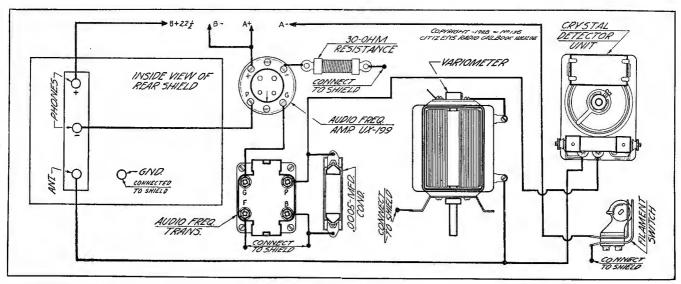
The receiver should be wired by the graphic illustration shown above. Parts for the set may be placed in accordance with the photograph shown in Figure 1
